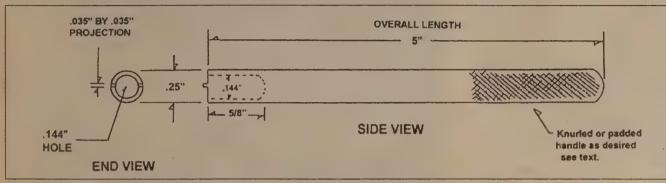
End and side mechanical views of the Slotted-Nut Tool used for 3/32" subminiature panel phone jacks.
